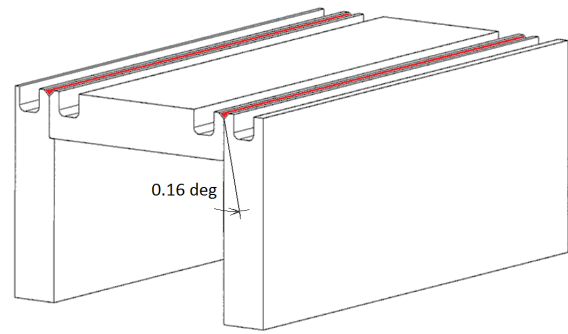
Test piece for estimation of weld distortion. The angular dimension is the most critical.
